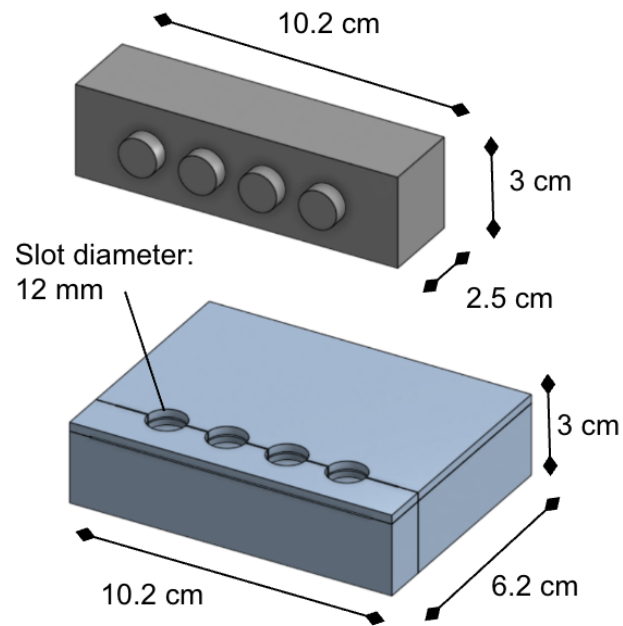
Biopsy Press Design and dimensions [Ella Lang]
